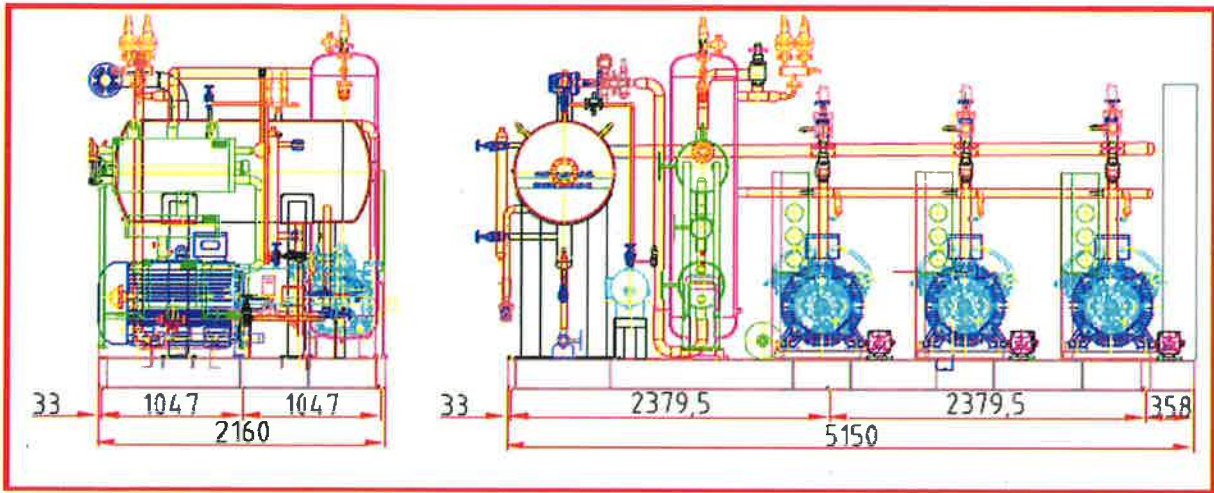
Overall Dimensional Drawing of the Heat pump Unit
